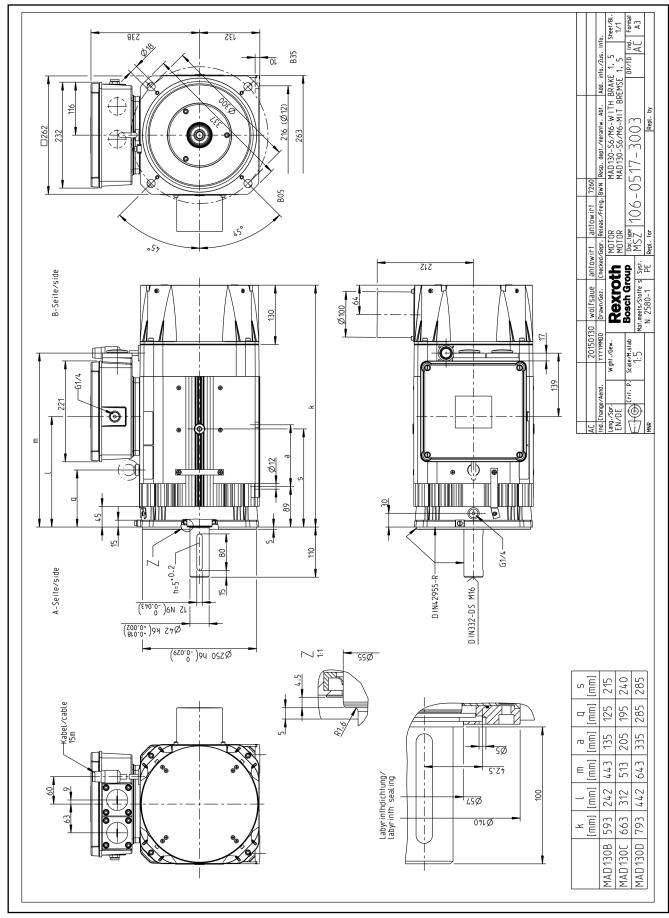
MAD130 with encoder M6/S6, brake 1/5
